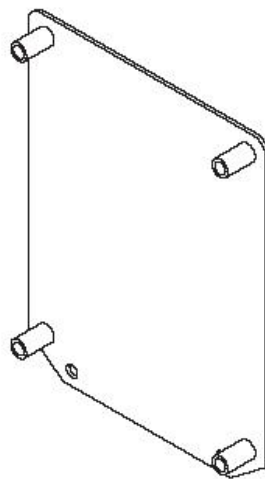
GANTRY OPTIONS BOARD MOUNTING BRACKET (BRACKET 2)
